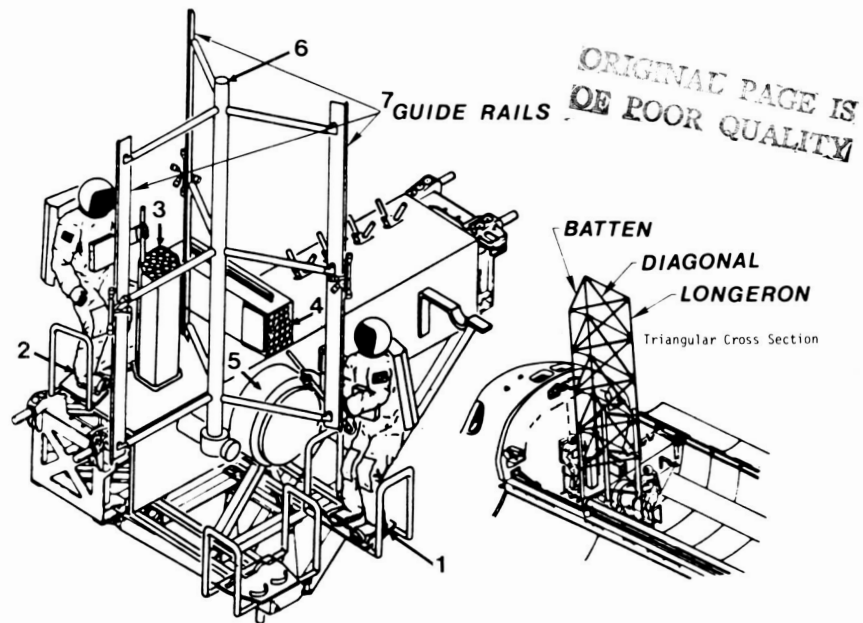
Schematic showing EVA construction of ACCESS truss on assembly fixture.
